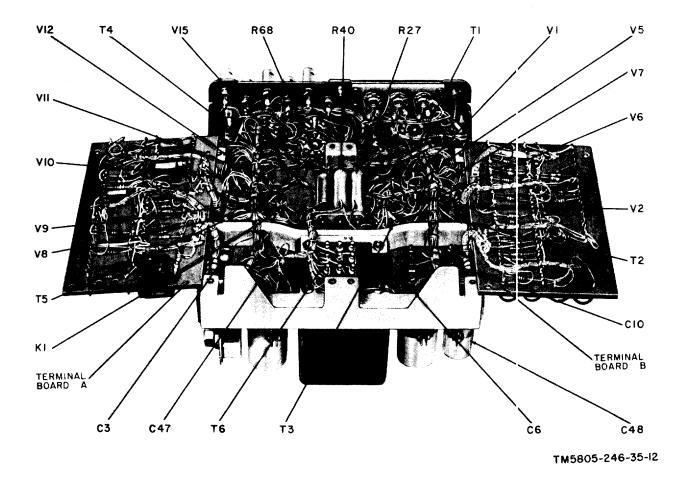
Bottom view of front panel and chassis assembly, location of parts with terminal boards open.
